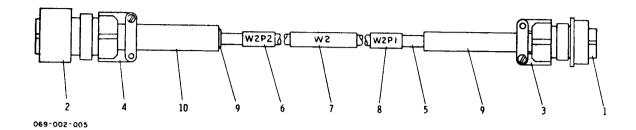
Power Cable Assembly (PN 4035549-0501)
